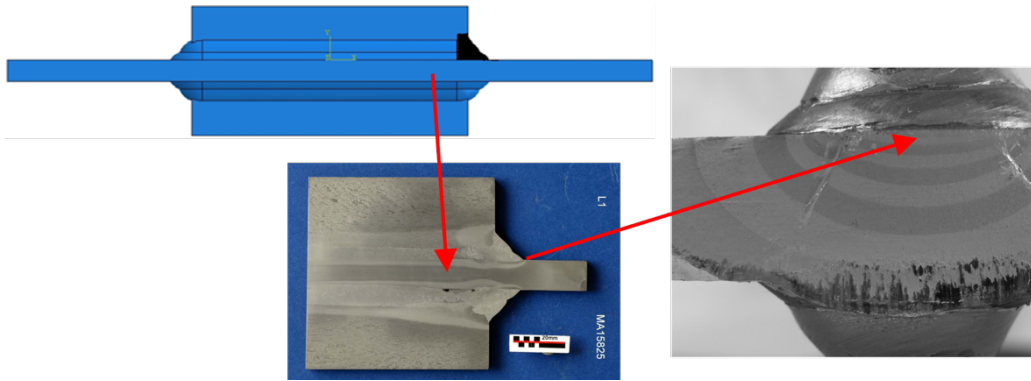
Fraunhofer IWM Longitudinal Stiffener Test Specimen with Fatigue Crack Initiation at Weld Toe [4]
